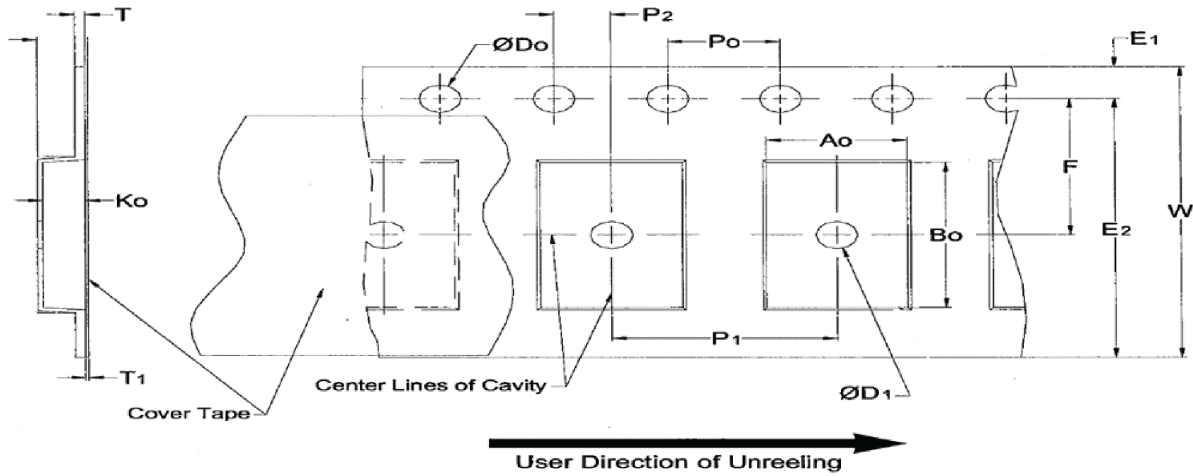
Tape and reel specification for the 12-lead 2.0 × 2.0 mm QFN package
